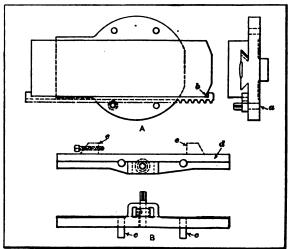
Appliances for Traversing Planer Tool-slide when Testing Bearing Surfaces
